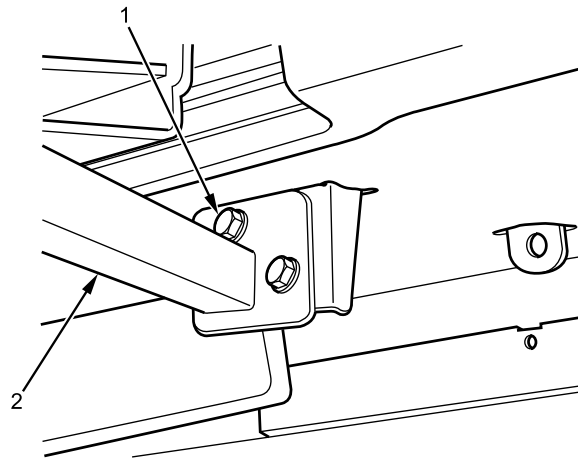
Left Side Gunner Platform Stand Mounting Bolts.
